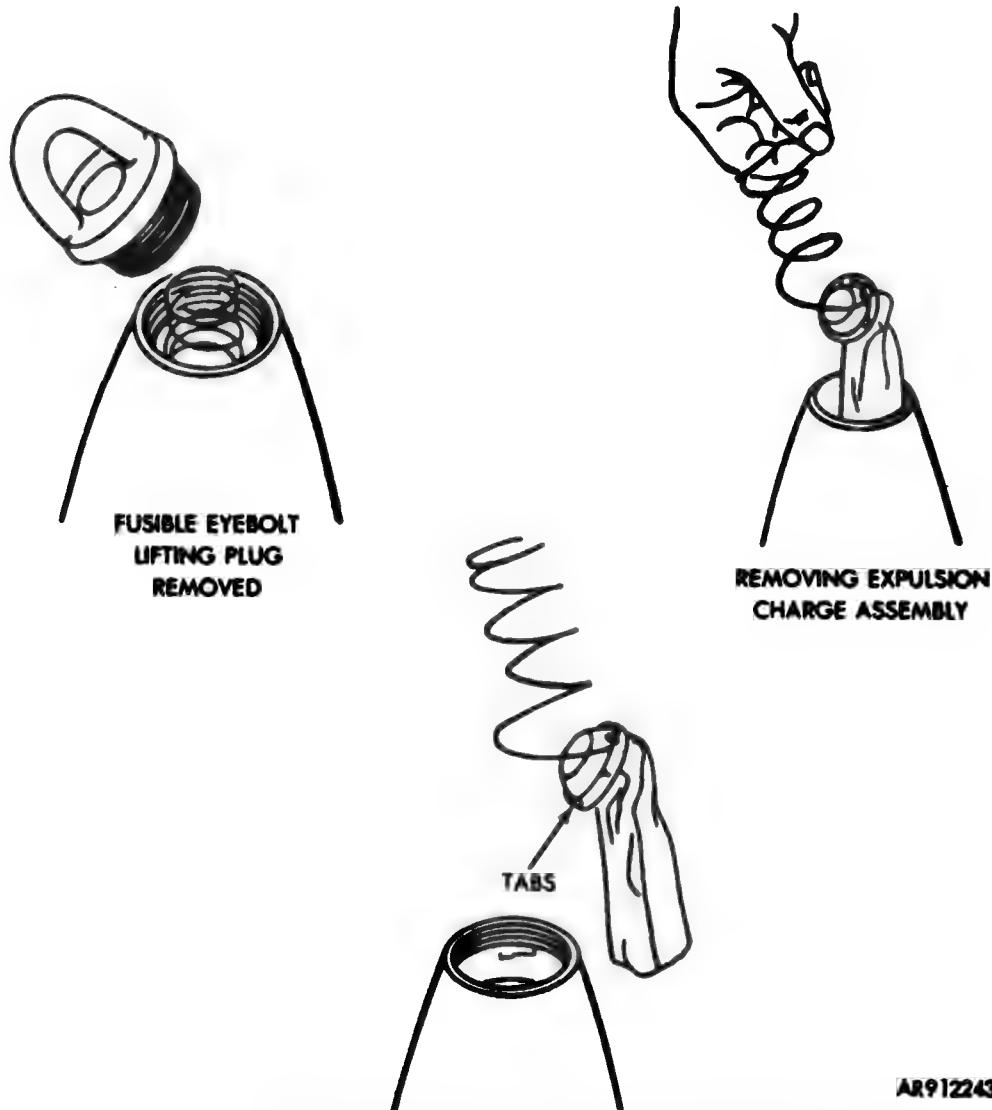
Removal of expulsion charge assembly—pull-wire design.
